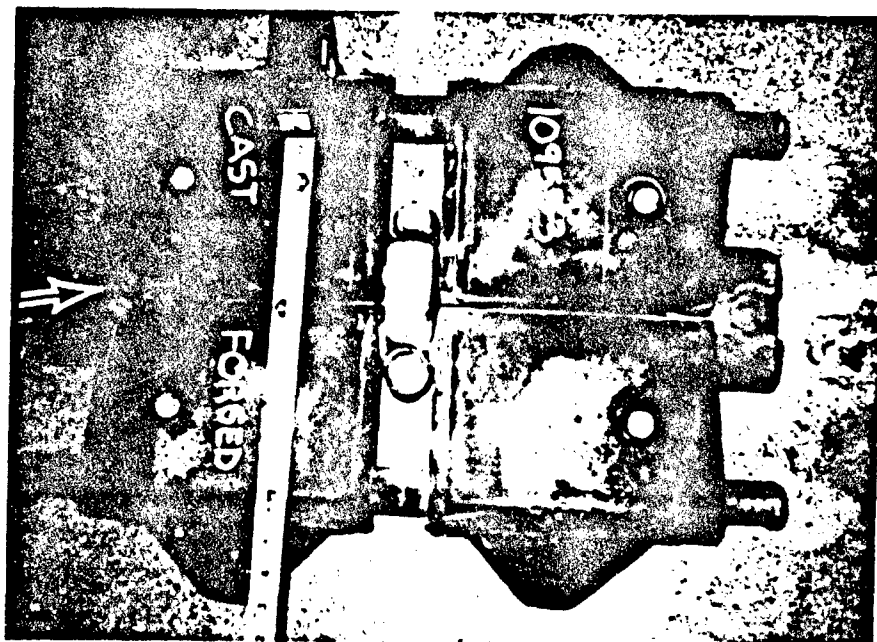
Cast - Forged Shoe Test, Note Crack at Arrow
